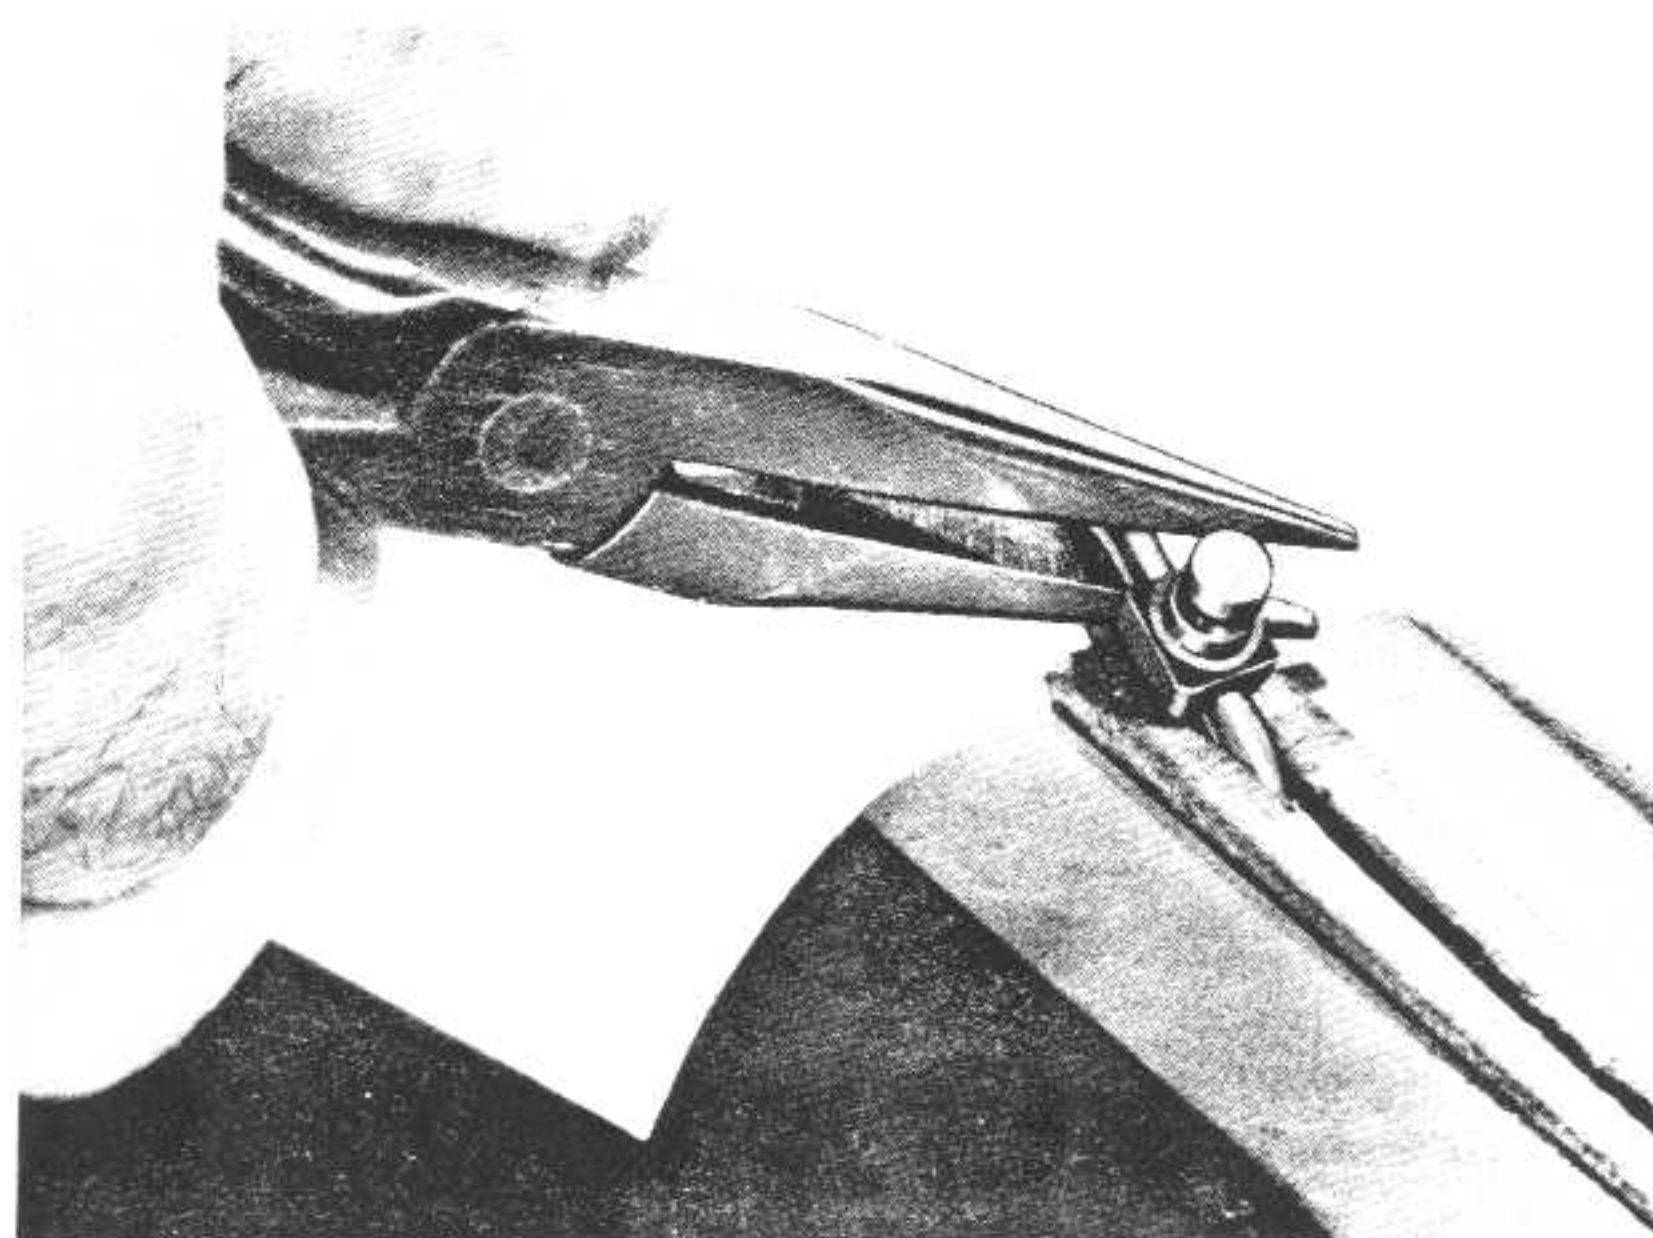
Removing Firing Pin from Hammer of Smith and Wesson Revolver M1917
